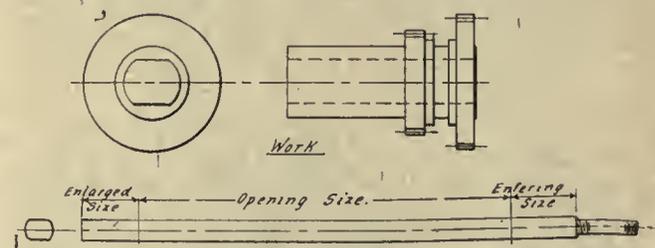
WORK AND BROACH FOR ENLARGING HOLE IN HARDENED GEAR.
